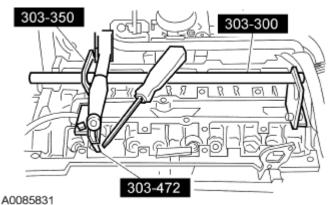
Identifying Valve Spring And Valve Spring Retainer
